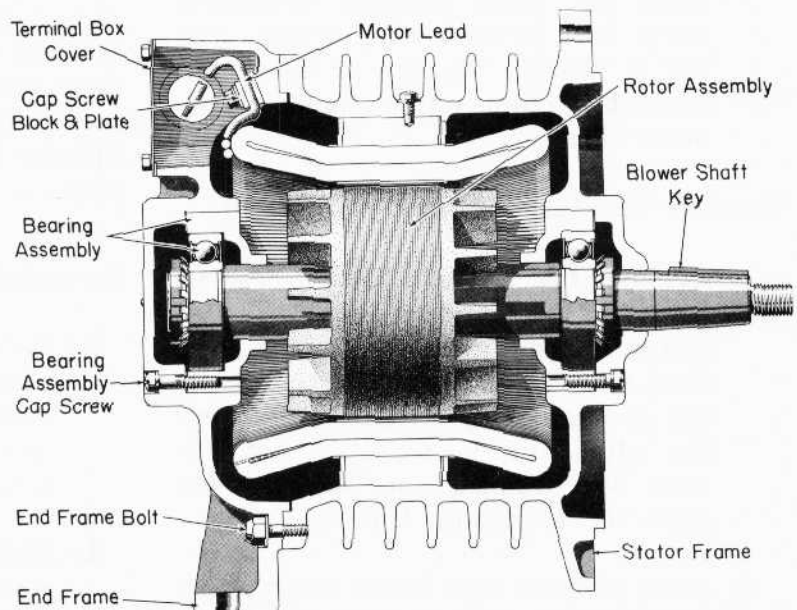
Cross-Section Drawing Of Traction Motor Blower Motor
